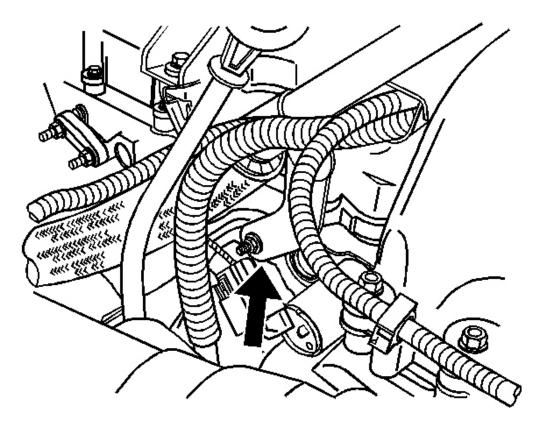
View Of Oil Level Indicator Tube Bracket Nut Courtesy of GENERAL MOTORS CORP.
